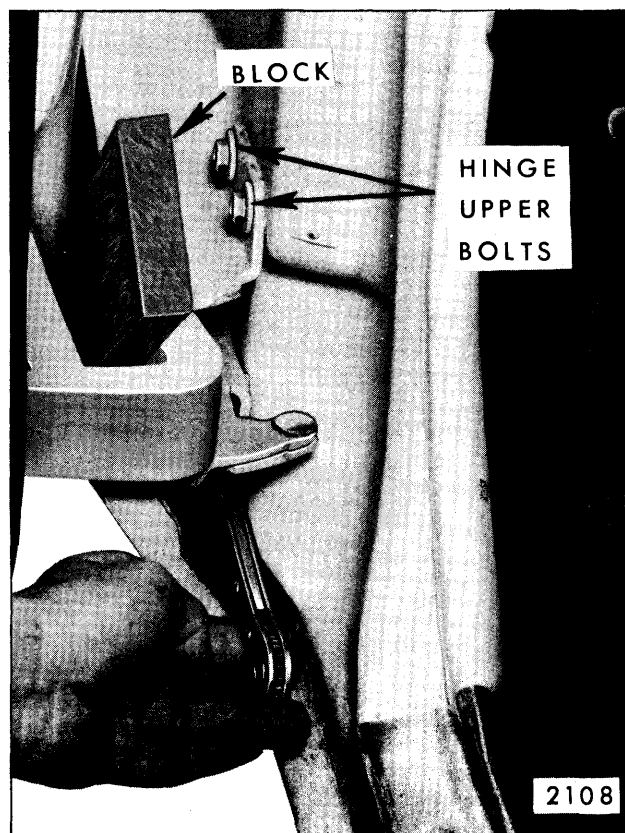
Front Door Hinge Removal - "E" Styles
